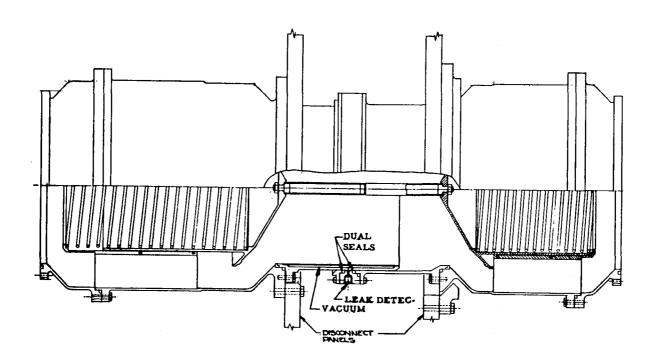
Poppet Valves, Internal Mechanical Actuated
